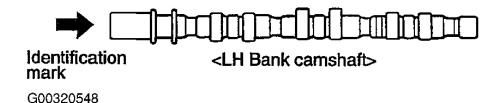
Illustrating Camshaft Inscribing Position Courtesy of KIA MOTORS AMERICA, INC.
